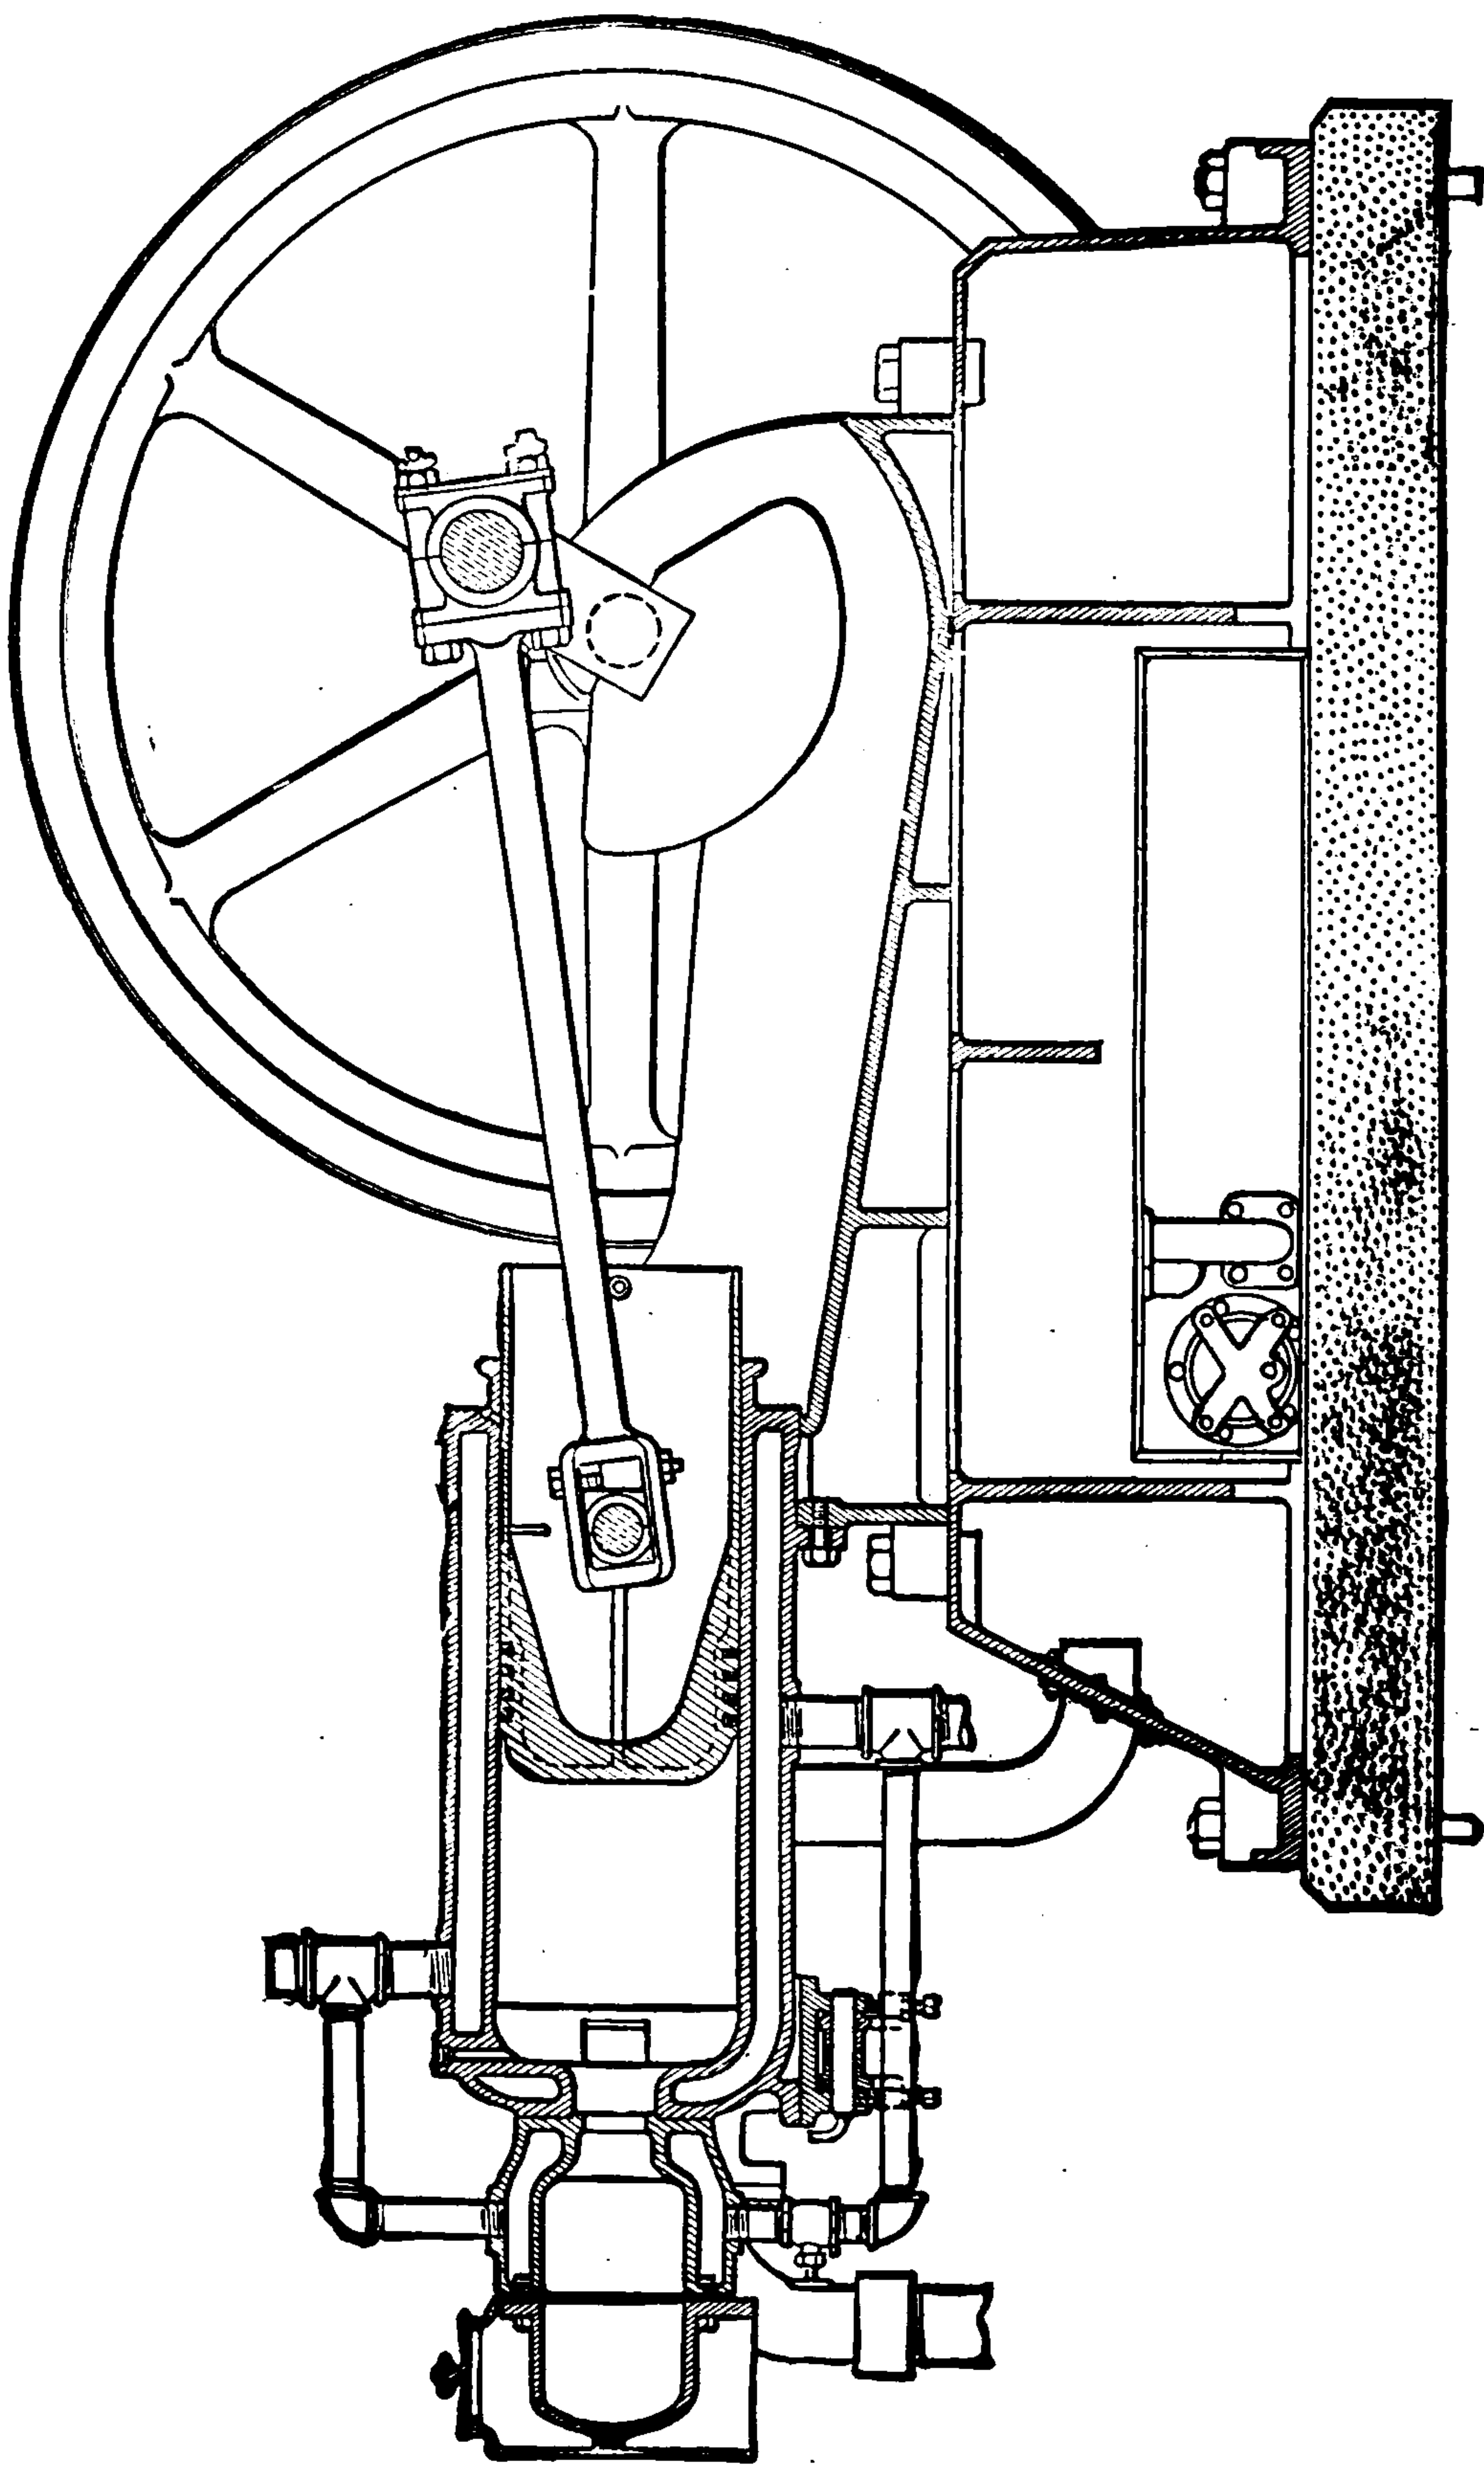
SECTIONAL ELEVATION, HORNSBY-AKROYD OIL ENGINE.
